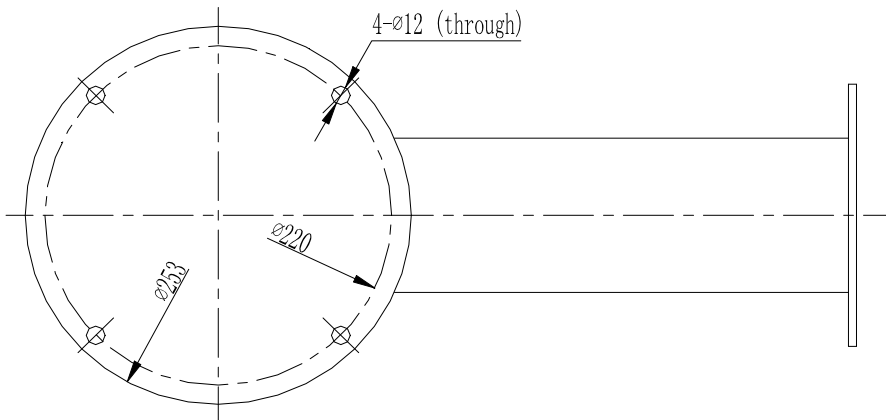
Front view of Wall-mounted Bracket
